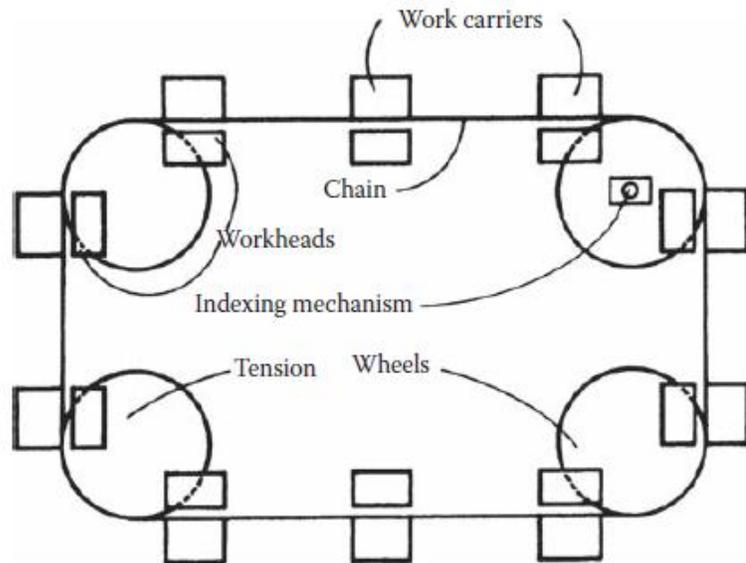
(c) BELT DRIVEN TRANSFER SYSTEM
